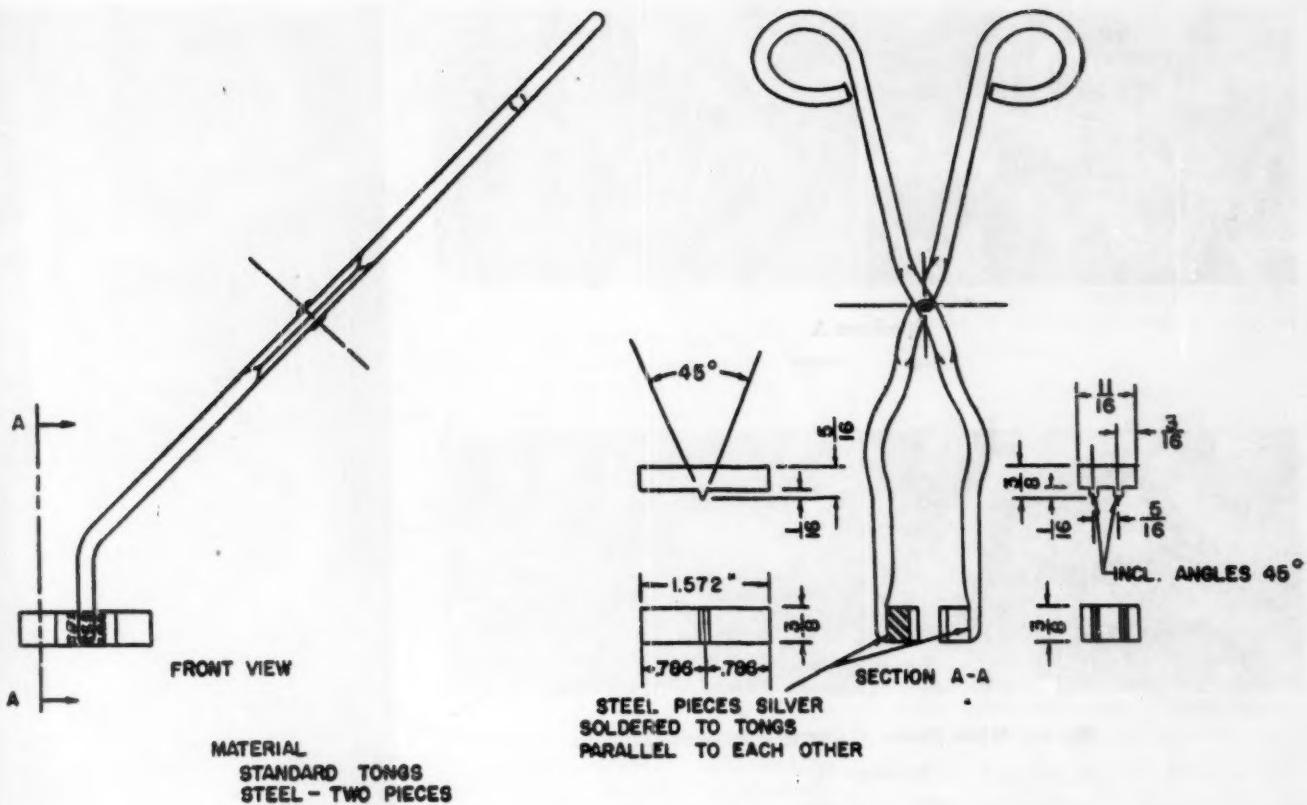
Charpy Tongs for Centering Specimens in Machine.
